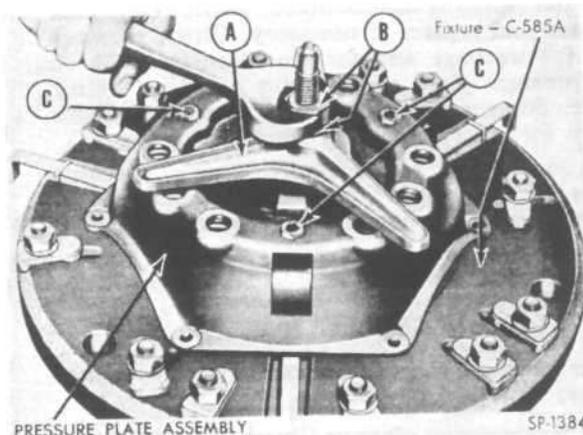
DISASSEMBLING SIX SPRING CLUTCH
